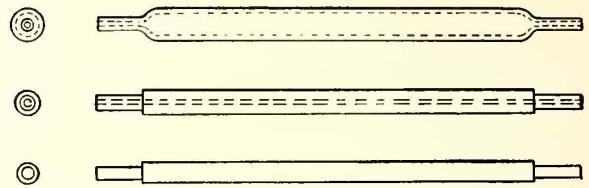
SOLID AND HOLLOW SHAFTS WITH SECTIONS.
